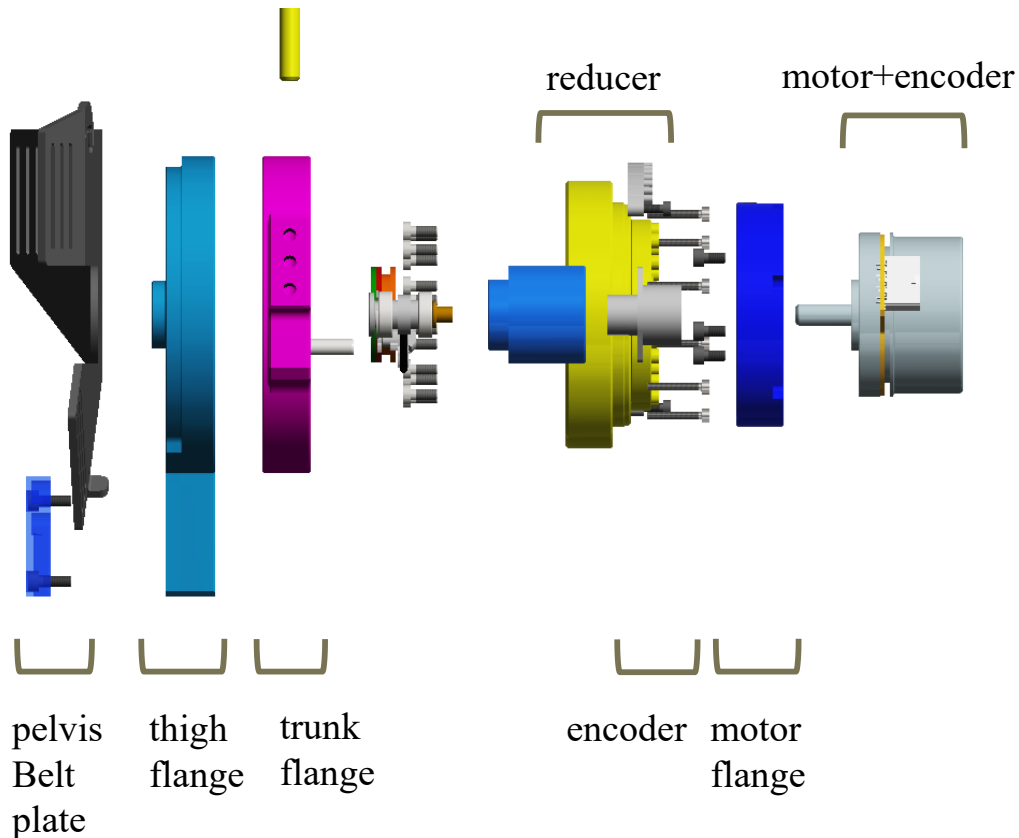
Exploded lateral view drawing of the powered joint: the final solution. Labeling of the several components.
